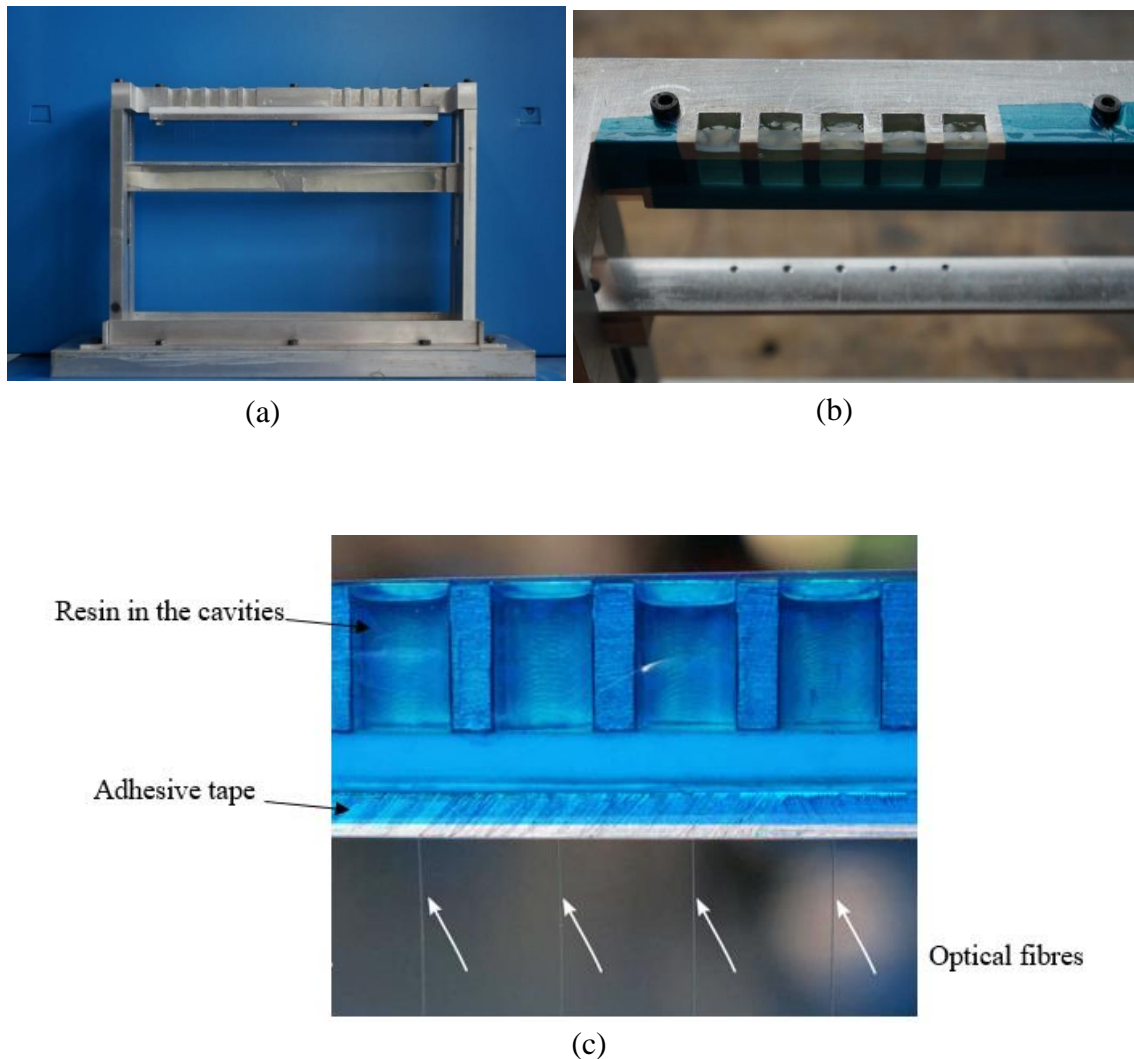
Mould for production of samples. (a) Pull-out mould (b) mould top view and (c) mould detail.
